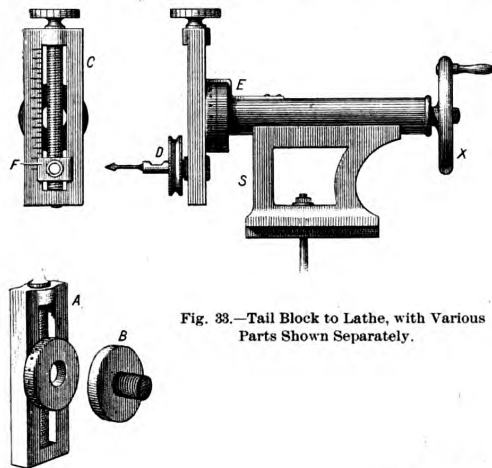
Tail Block to Lathe, with Various Parts Shown Separately.
